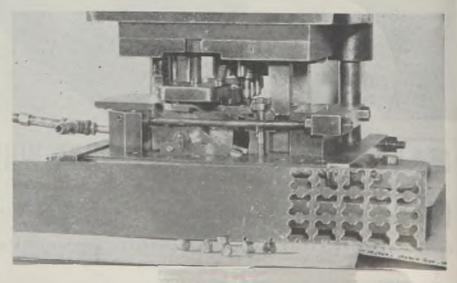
shows the unique die setup employed to perforate the wire holes in 400-ampere detachable lugs, done on a 60-ton press with a 3½ inch stroke. Two Fig. 4-Typical of complicated progressive die sets that handle multiplicity of blanking and forming operations simultaneously by means of slides and cams. Five stations are used here to produce four 60-ampere fuse clips at each stroke of press as follows: Perforate hole for first and third clip, also blank 99 per cent of second and fourth clip; perforate second and fourth clips, blank 99 per cent of first and third clips; form to final shape; shear remaining 1 per cent, separating parts. Sequence illustrated by parts in foreground
